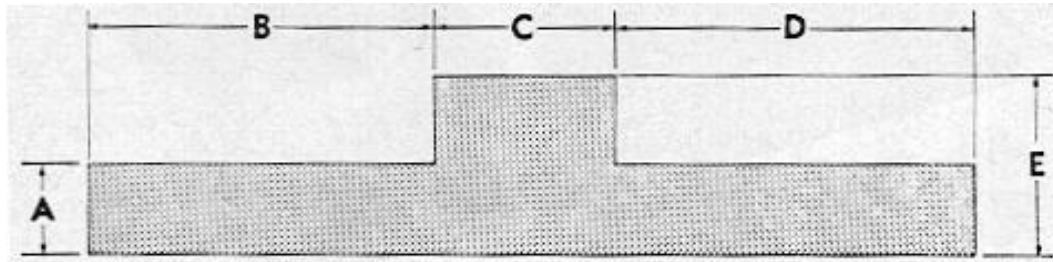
MOUNTING FIXTURE HOLE DIMENSIONS
